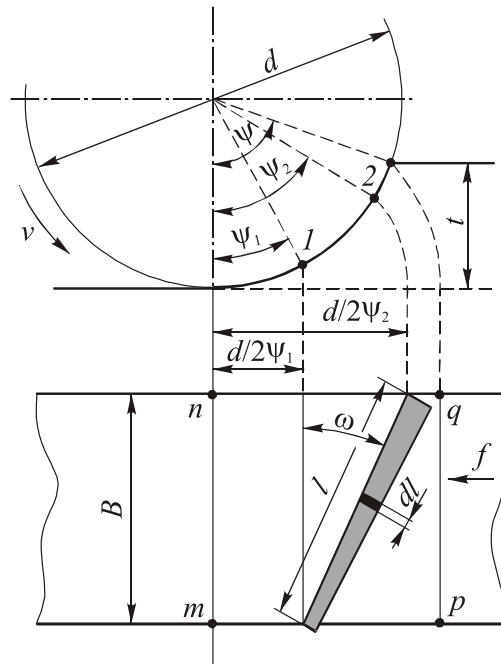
Thickness of the layer being removed by a helical tooth of a slab mill
